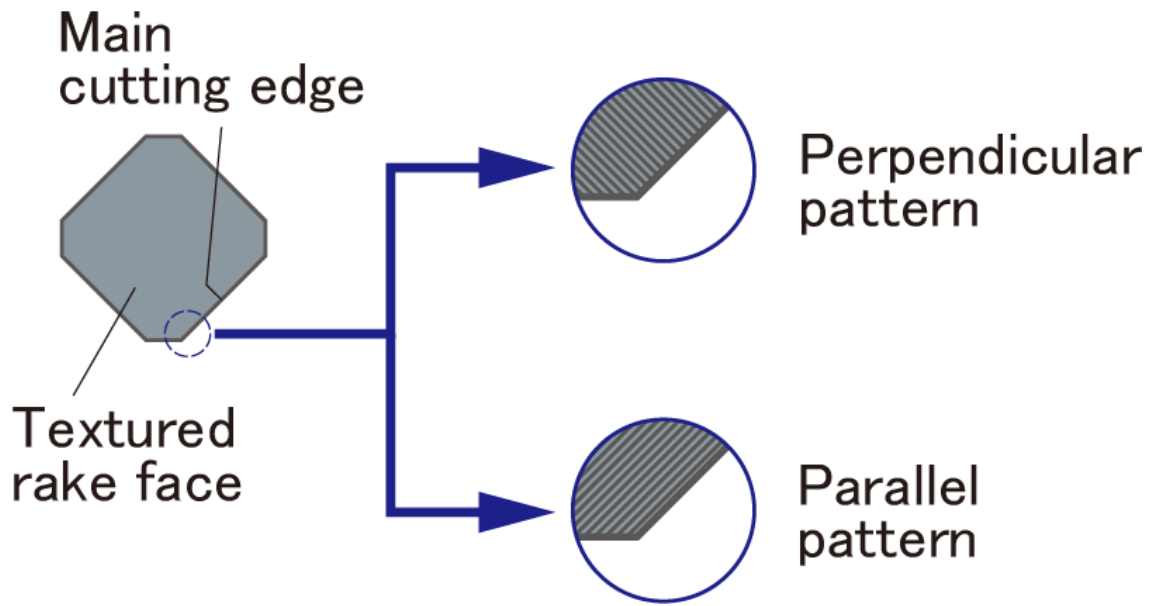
Cutting tools with micro stripe texture in face milling [2-8] [2-9]
